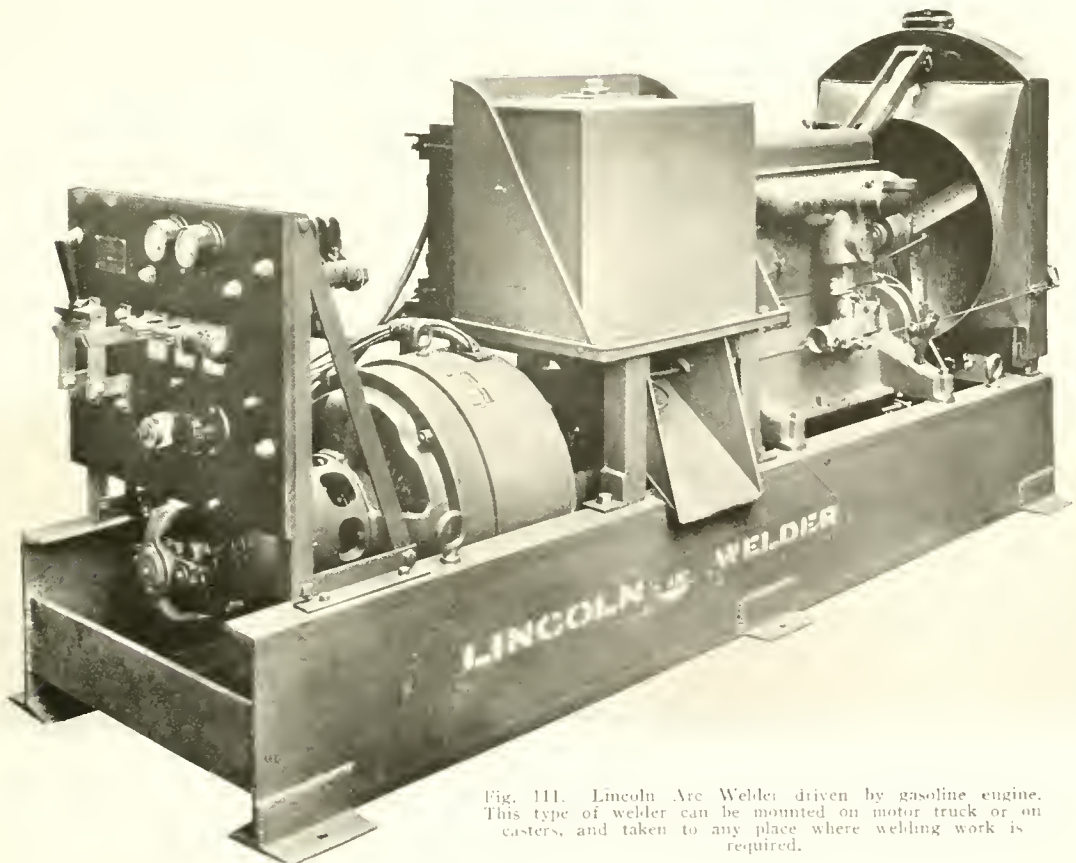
Lincoln Arc Welder driven by gasoline engine. This type of welder can be mounted on motor truck or on casters, and taken to any place where welding work is required.
